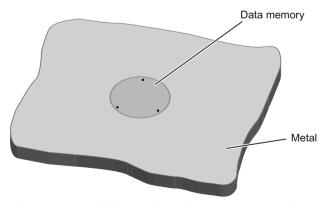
Flush-mounting of MDS D422 / D522 in metal without clearance
